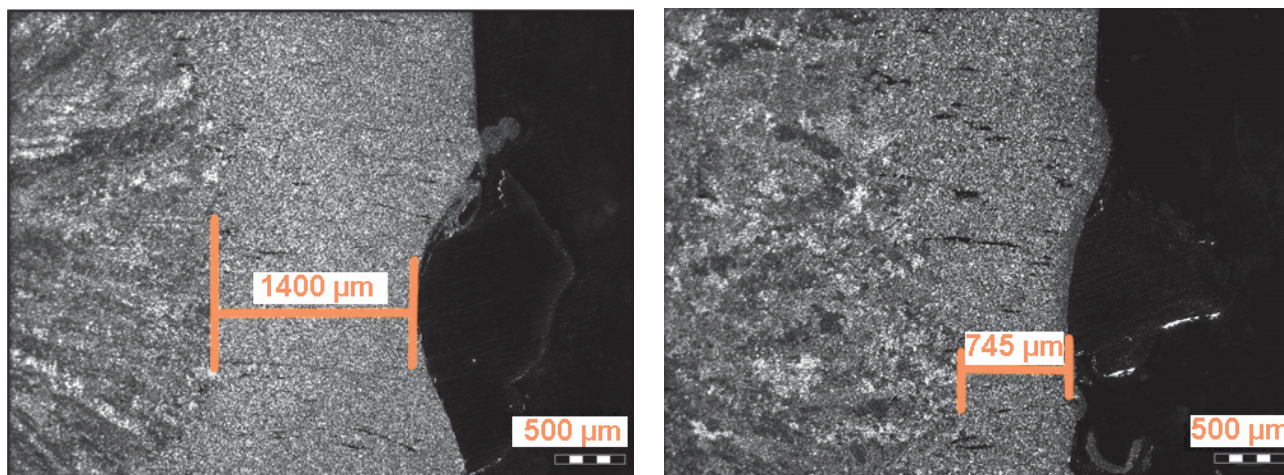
Metallographic investigation of welded joints obtained by:
